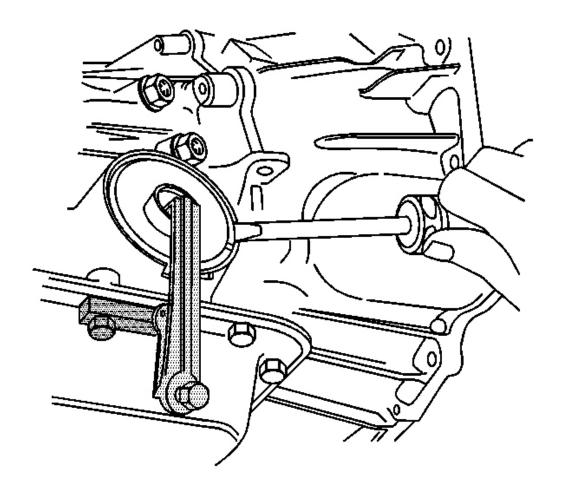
Removing The Servo Cover Ring Courtesy of GENERAL MOTORS CORP.
